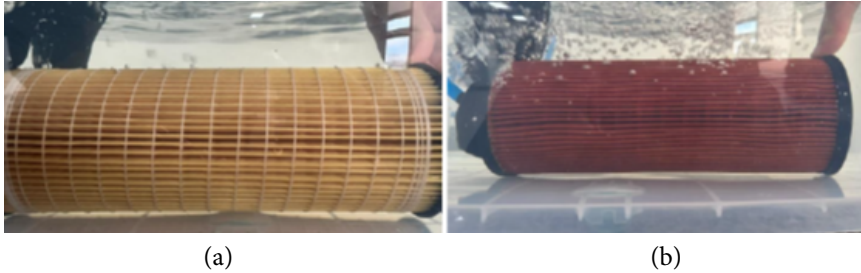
Fuel filter a) IR welded b) adhesively bonded at bubble test
